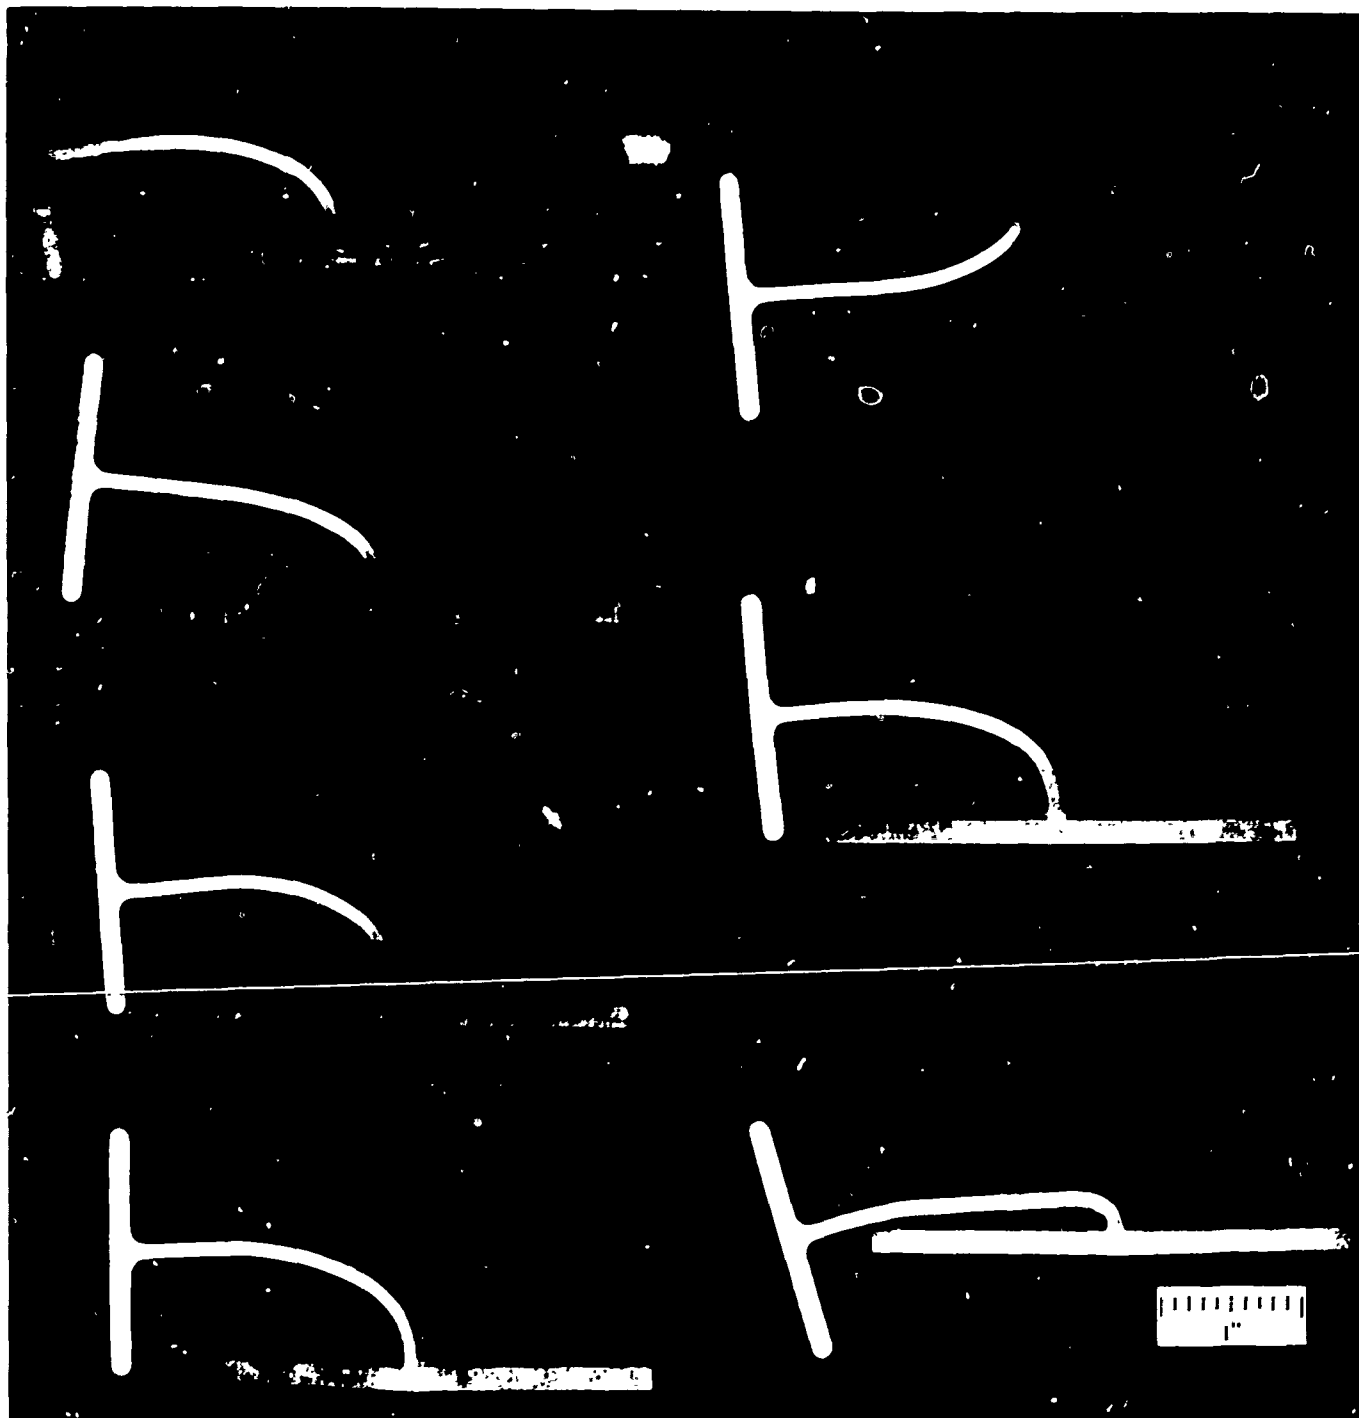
TYPICAL SIDE BEND TESTS OF WELDS MADE WITH
